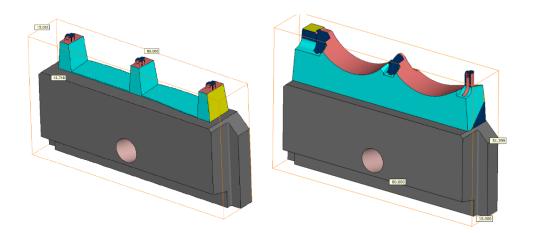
The inserts that work in conjunction to shape the part. Only the insert on the right was studied and produced by hybrid manufacturing - SLM + machining.
